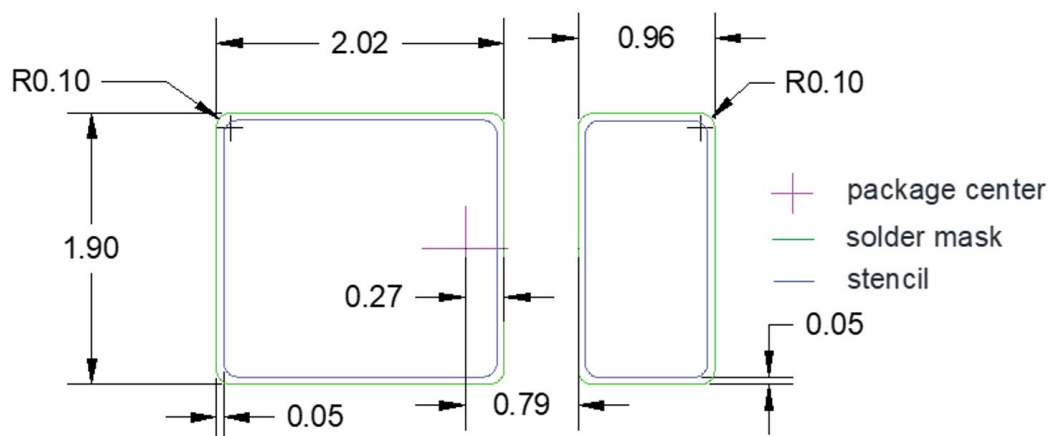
Recommended PCB solder pad layout for LUXEON 2835 Commercial Visual Consistency
